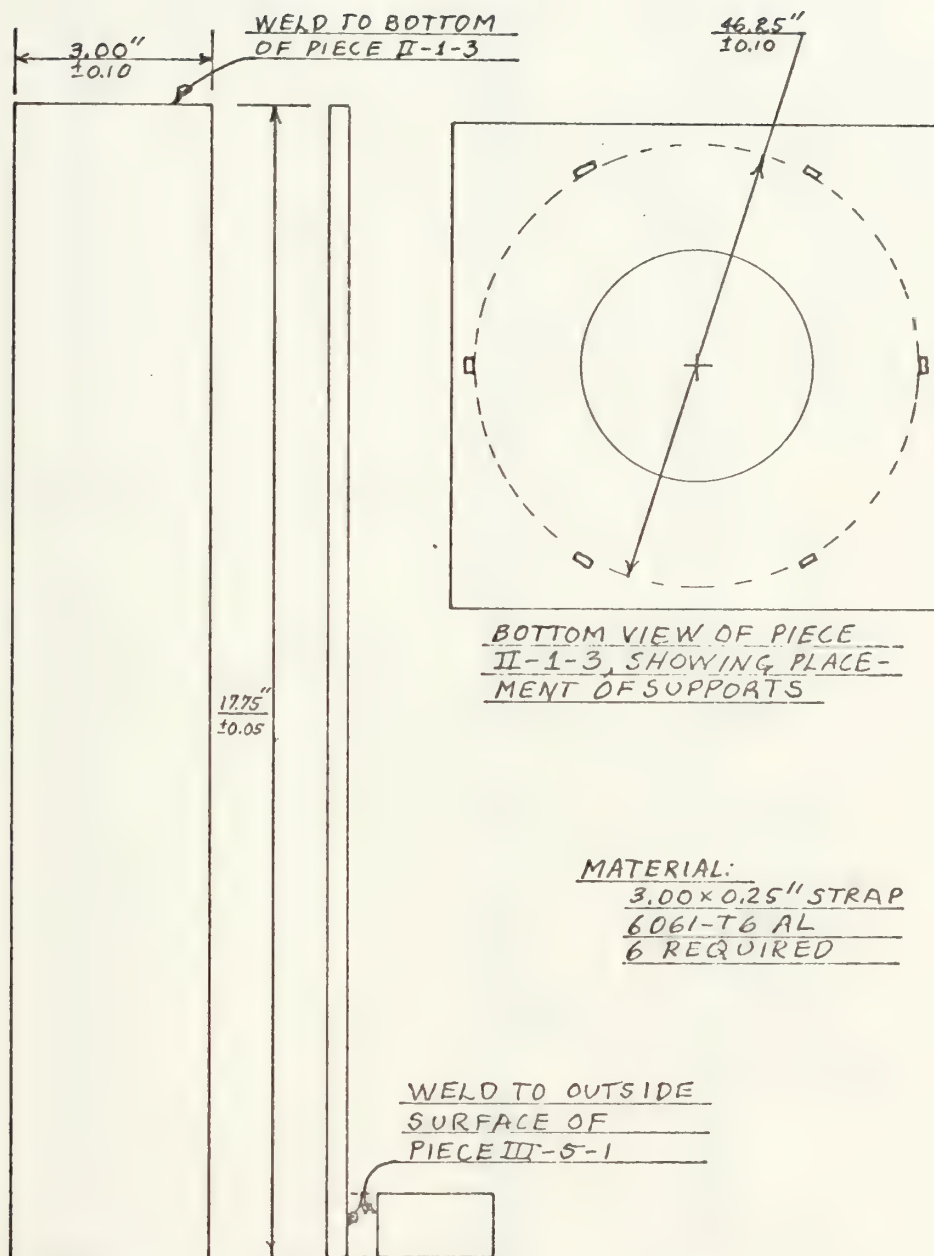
PIECE III-5-2, CORE CARRIER SUPPORT
